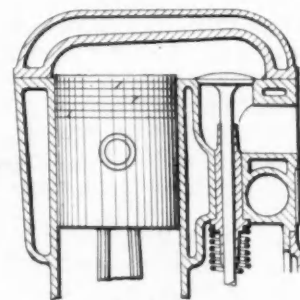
L-HEAD CYLINDER WITH HEAD PARTING PLANE SLIGHTLY BELOW PISTON FACE
